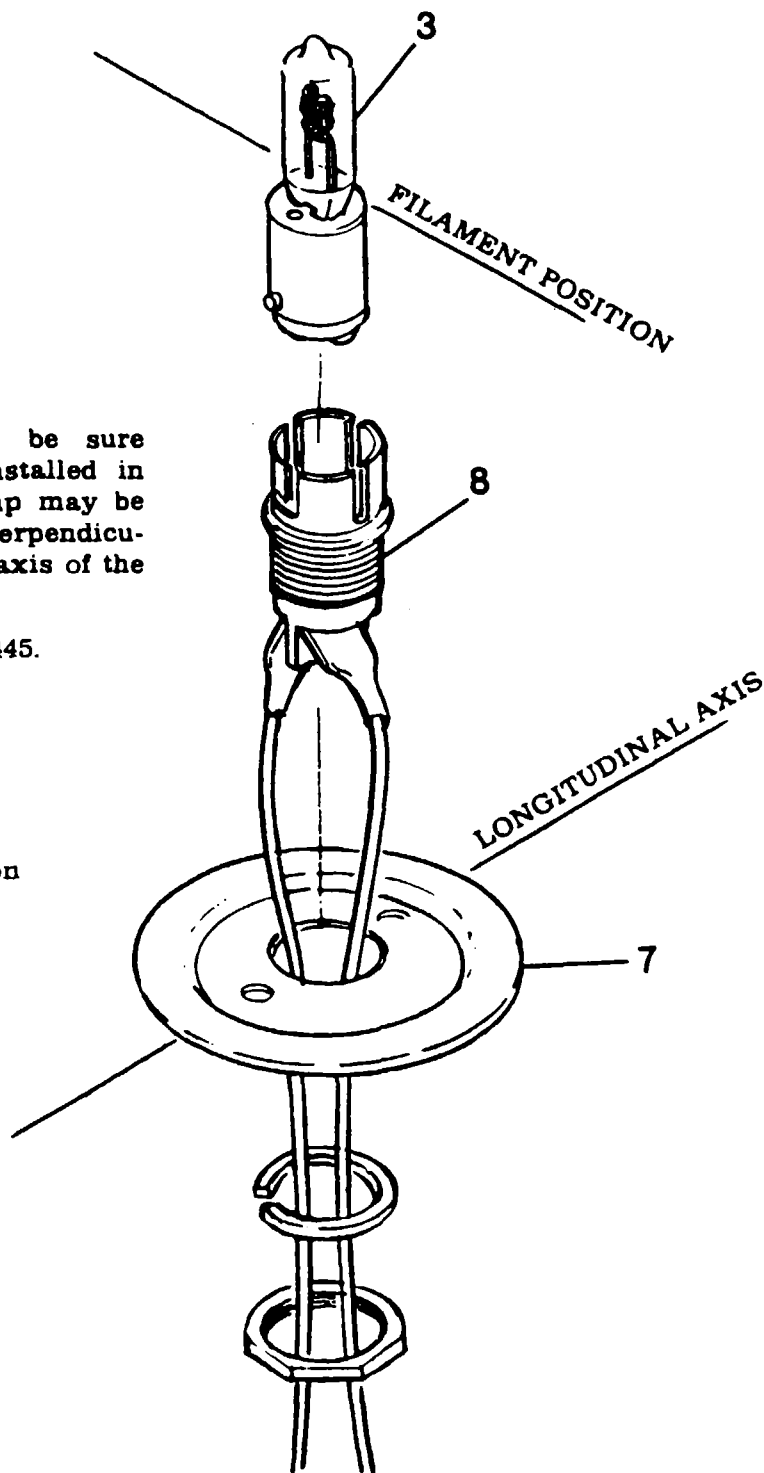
Flashing Beacon Installation (Sheet 1 of 2)
